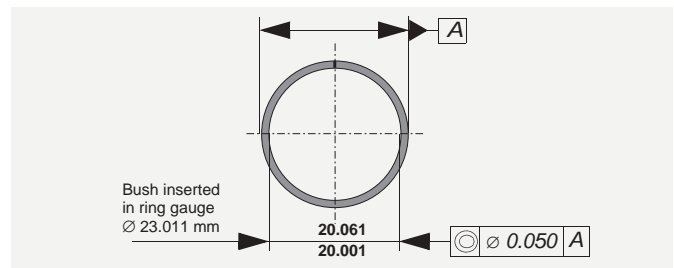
Test C, Data for drawing (example $D_i = 20$ mm)
